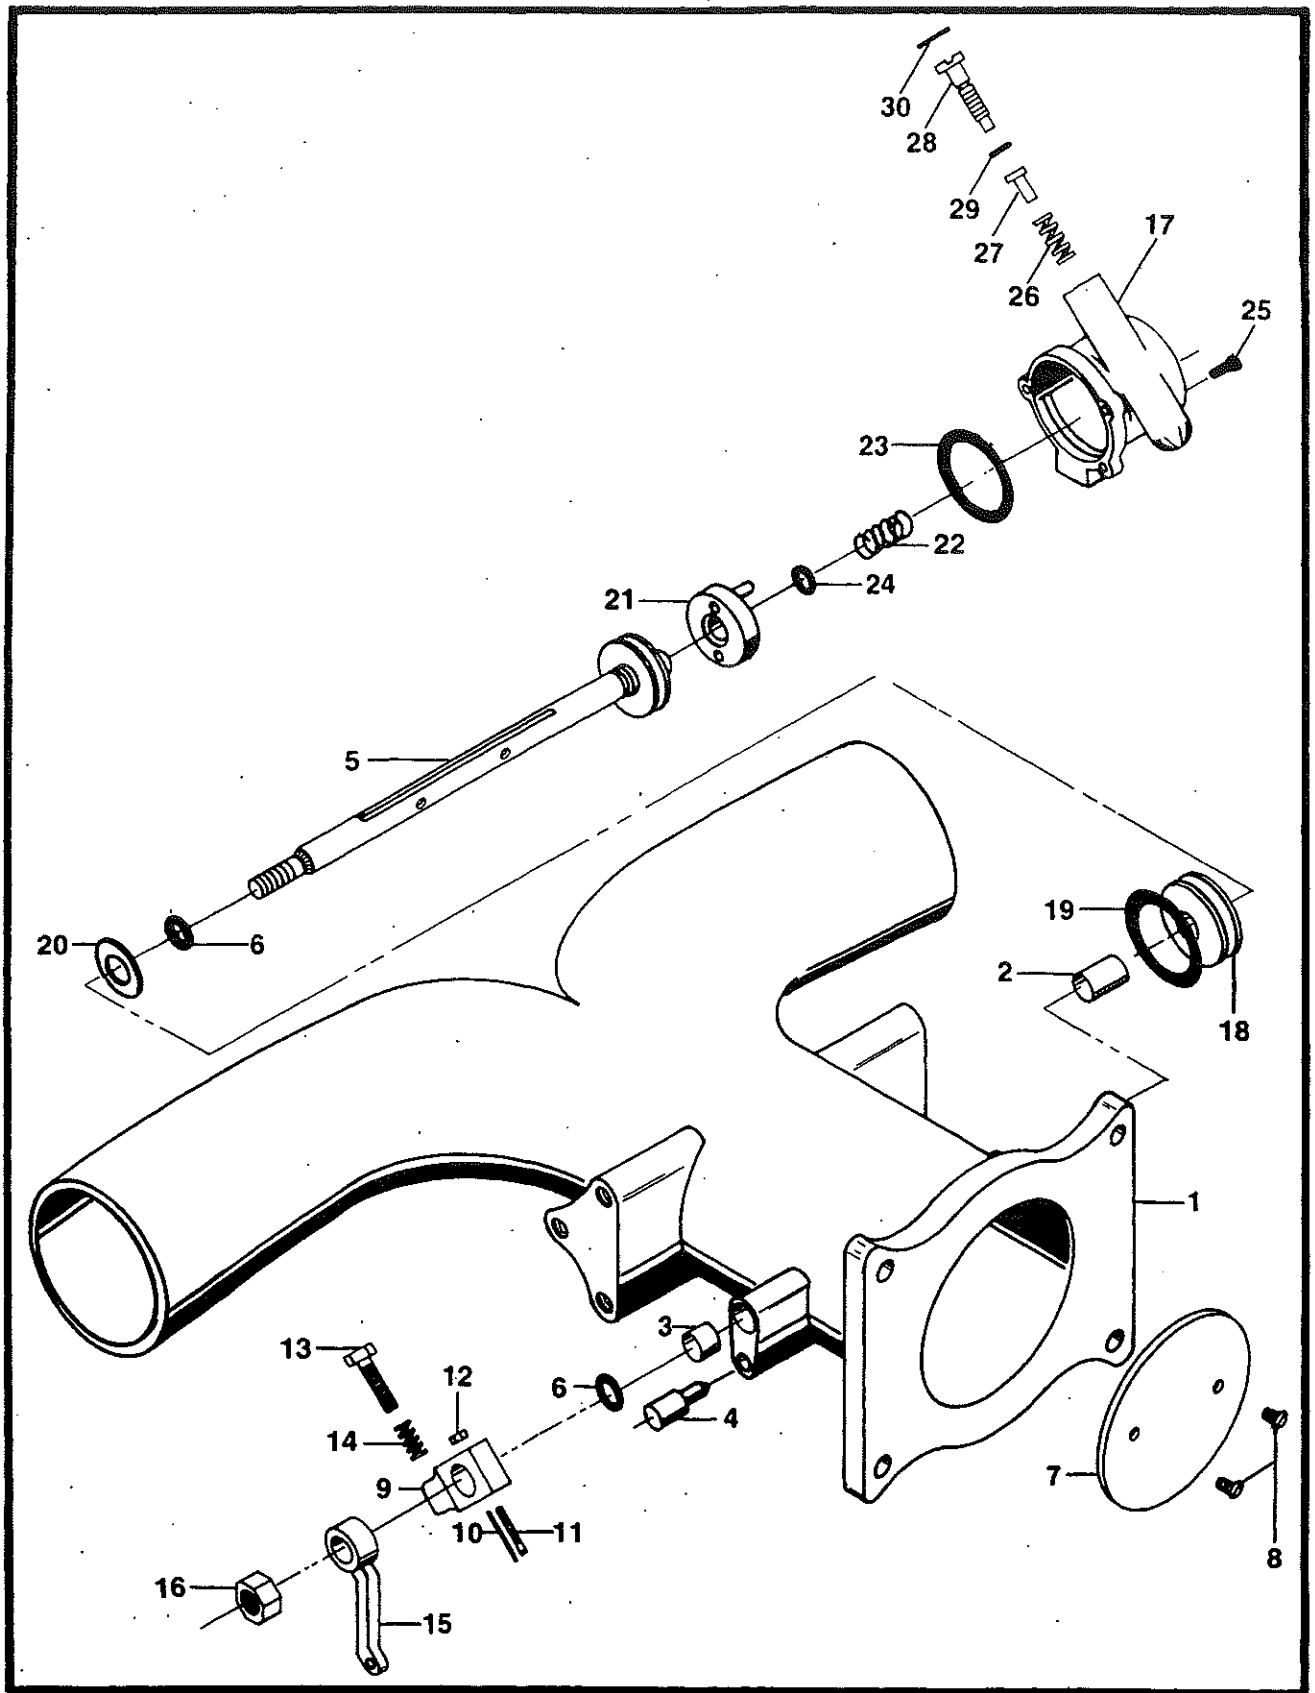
AIR THROTTLE AND FUEL METERING ASSEMBLY.
